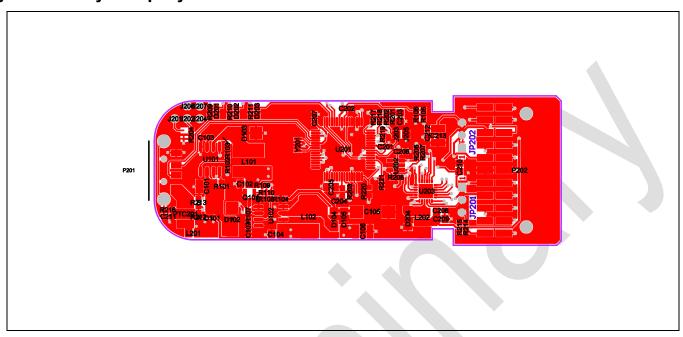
Layout Bottom Layer ZIOL2401 Starter Kit USB Stick
